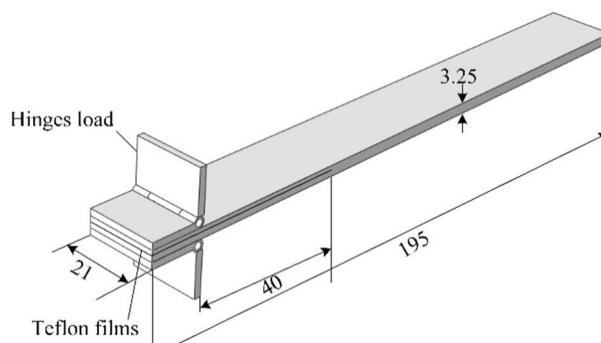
Geometry and dimensions of DCB specimen (all dimensions are in mm)
